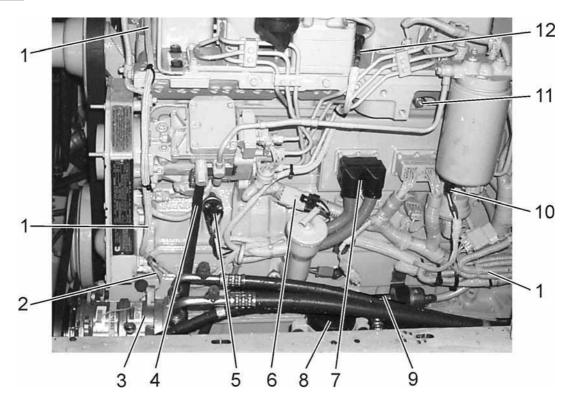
Engine Disconnecting Points (515G RH Side)
